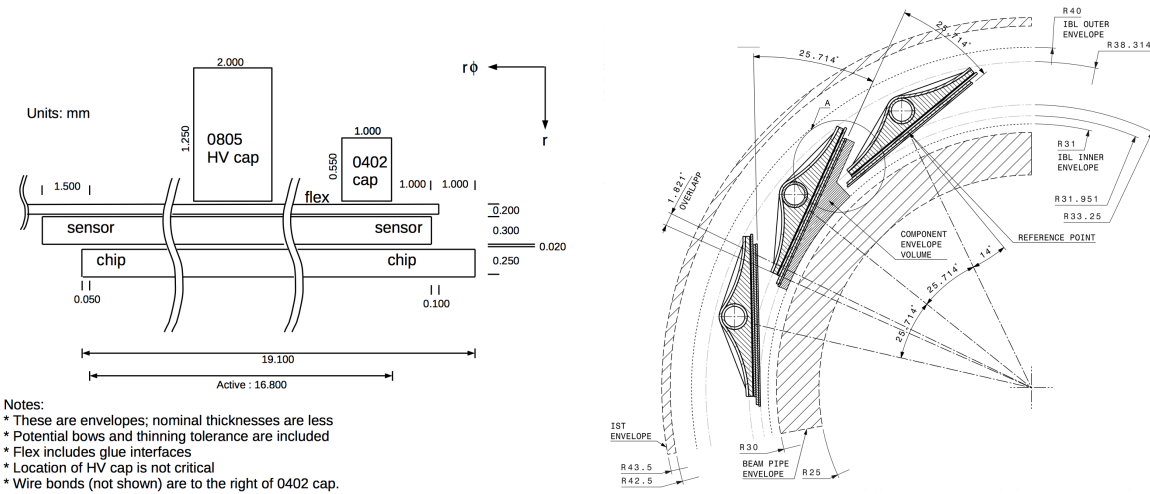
(Left) Cross section view of a planar module assembly. (Right) A cross-sectional view of the layout of IBL staves [149].
